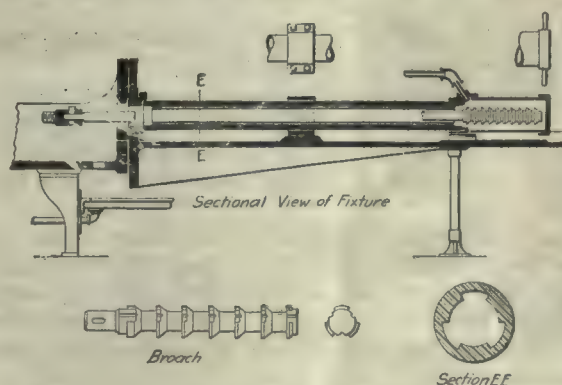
LINE DRAWING OF CYLINDER SET-UP FOR BROACHING
